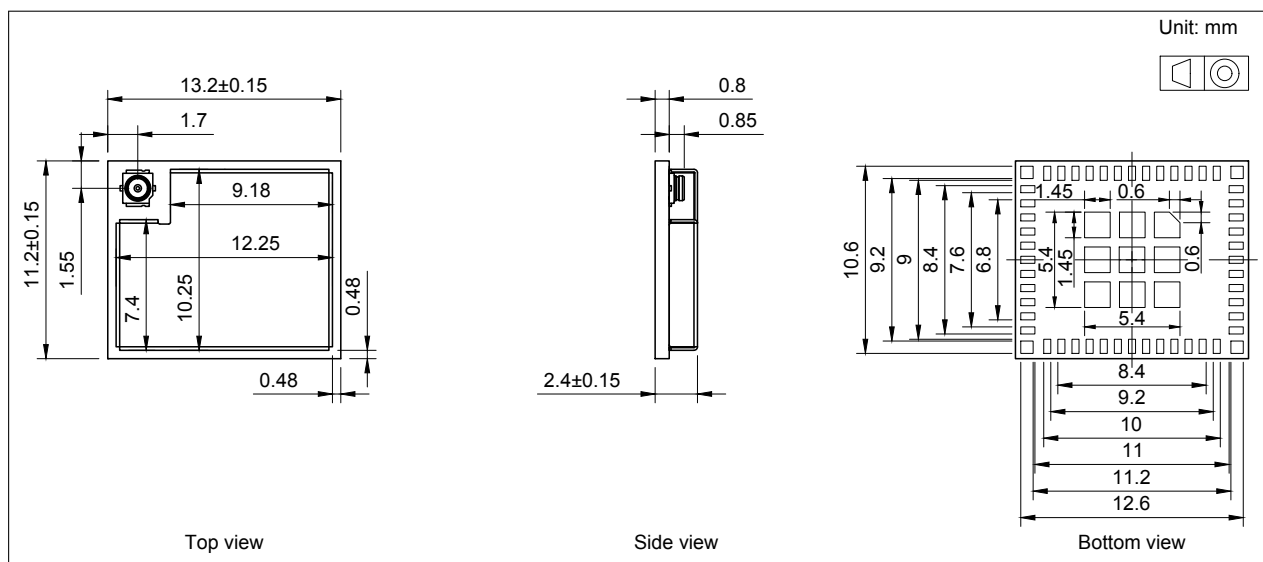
ESP32-PICO-MINI-02U Physical Dimensions
